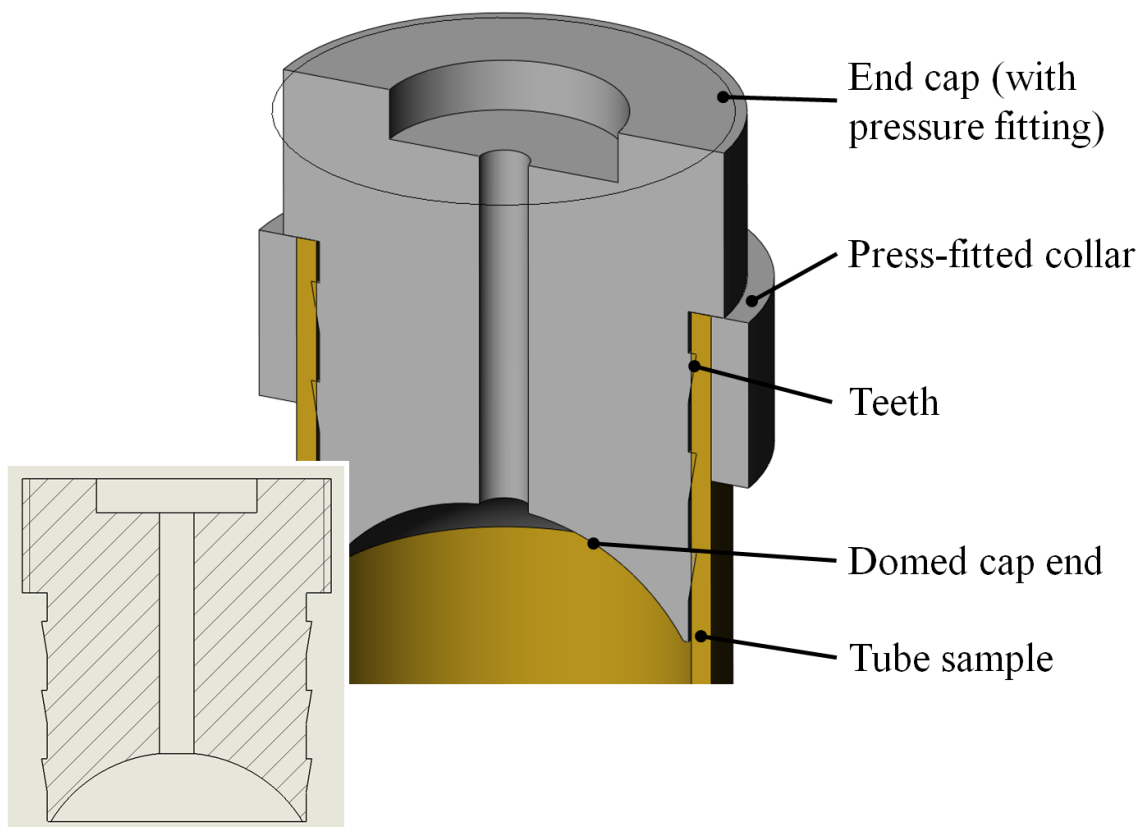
Design for mechanical end cap to circumvent need for brazed joints. Schematic of mechanical sealing features. Inset: engineering drawing of end cap.
